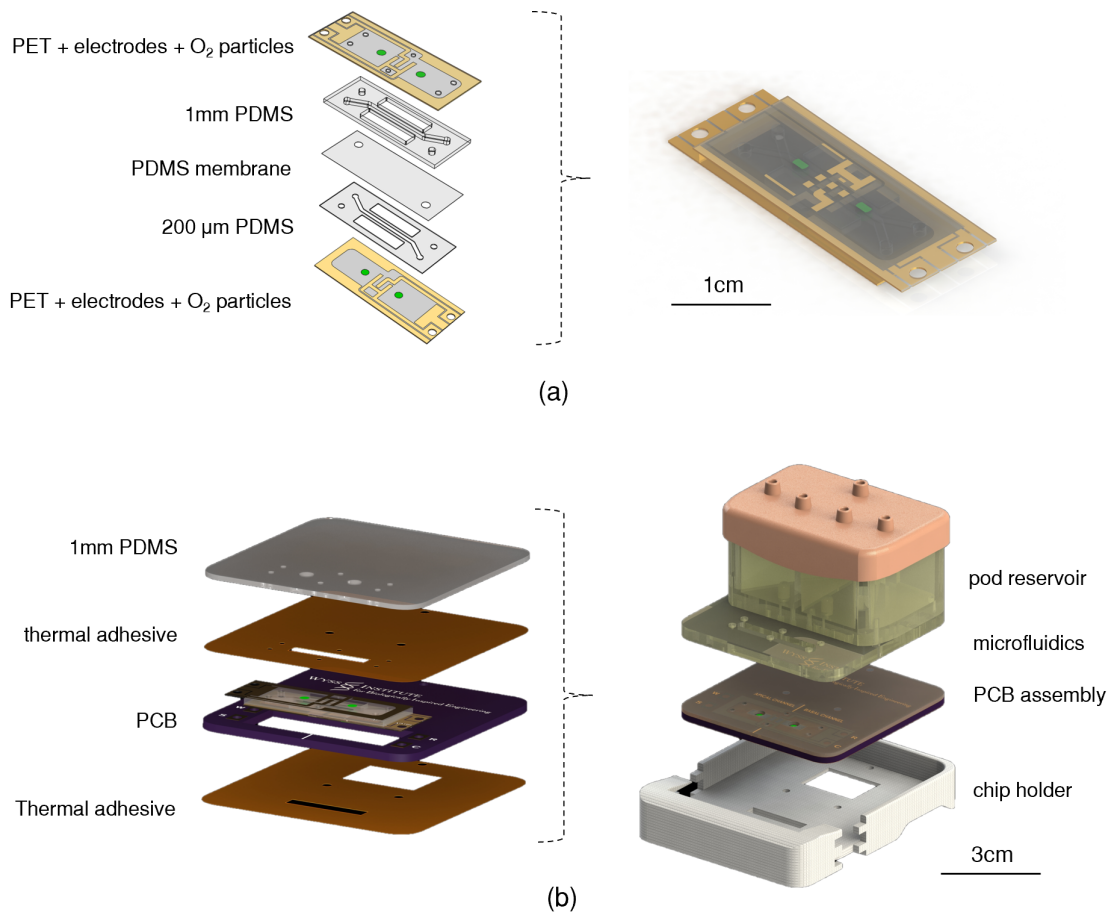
Sensor chip complete assembly(a) Sensor chip layering and assembly. (b) PCB assembly and compatibility with Emulate pod and microfluidics.
